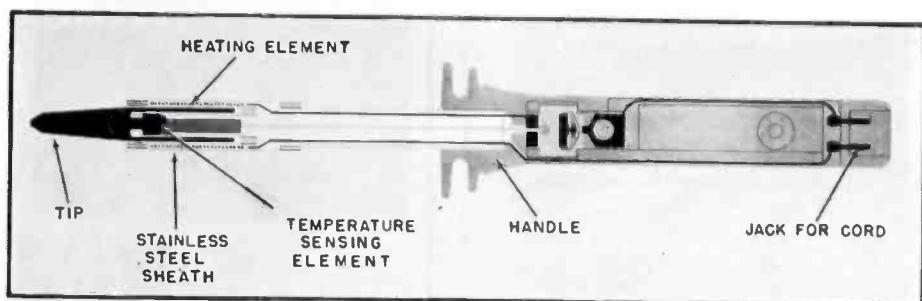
CROSS-SECTIONAL VIEW of soldering iron with temperature control built into tip.
